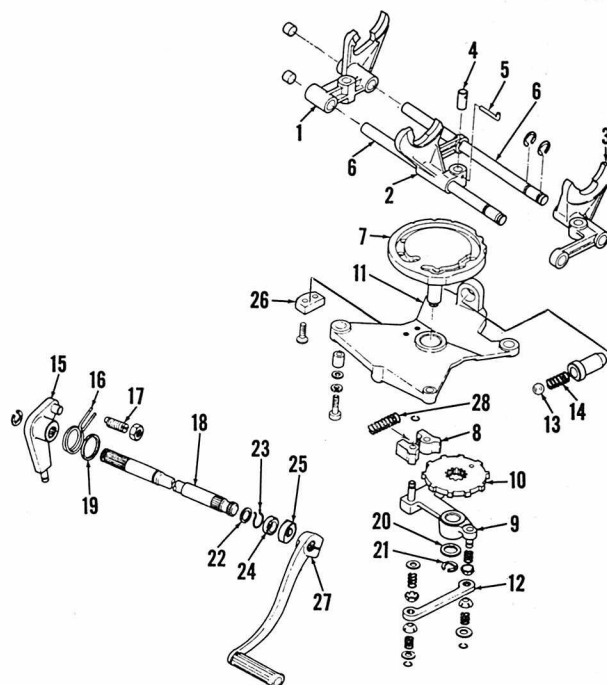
Cross sectional view of the shift assembly. Refer to Fig. 7-25 for legend.
